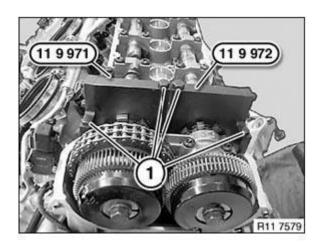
Identifying Special Tools (11 9 971) And (11 9 972) Courtesy of BMW OF NORTH AMERICA, INC.
